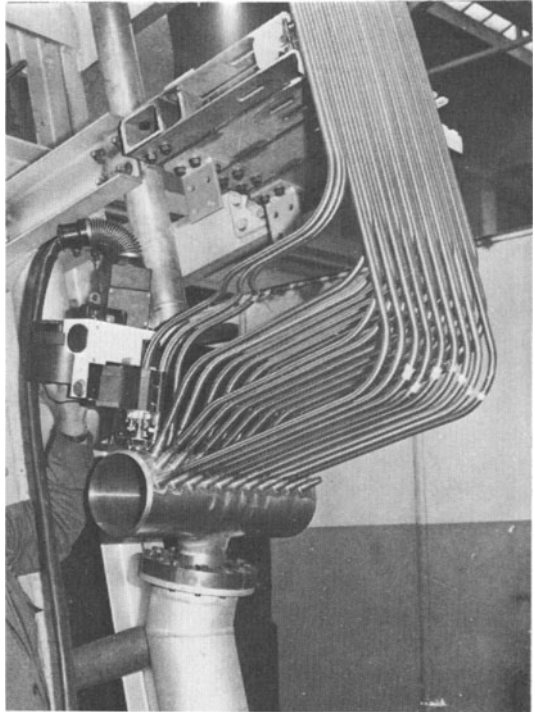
Automatic orbital welding of absorber tubes to bottom header
